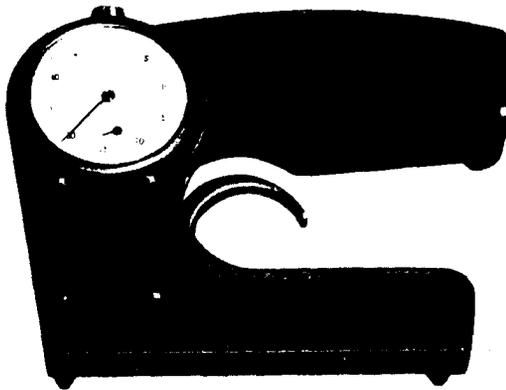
Examples of the Gauge Plug used in the Contact Gauge Method
